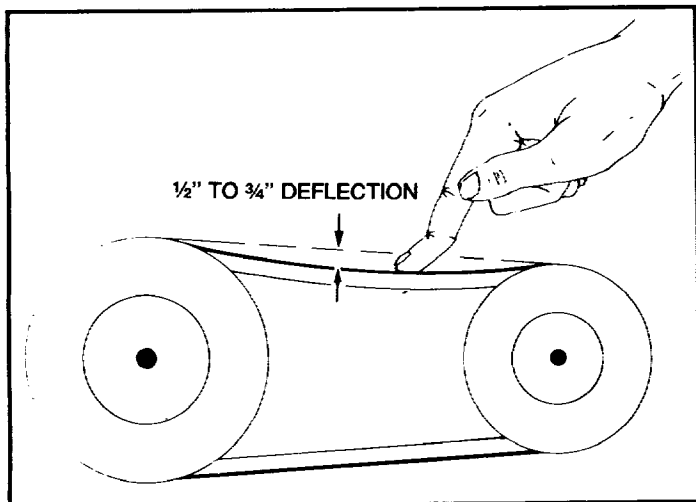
Checking Purge Compressor Drive Belt Tension (CVHE Units thru "D"-Design Only)
